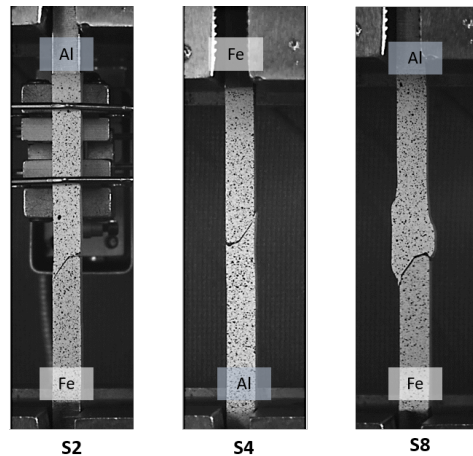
Pictures of the experimental set-up used for DIC testing. Note that, specimen S_4 is tested with the steel side on top [14].
